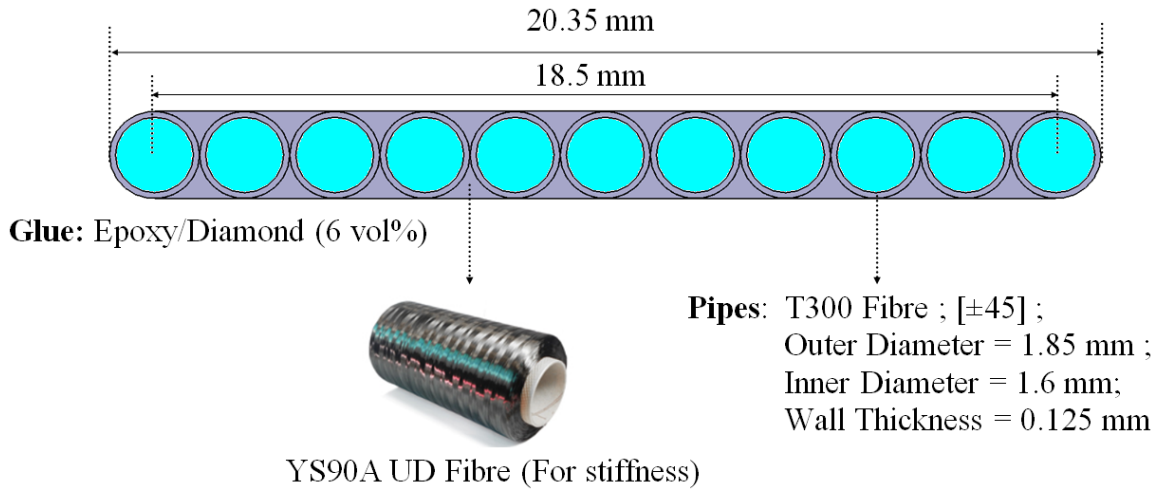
Development of the Eleven Pipe Stiffener stave with eleven cooling pipes
